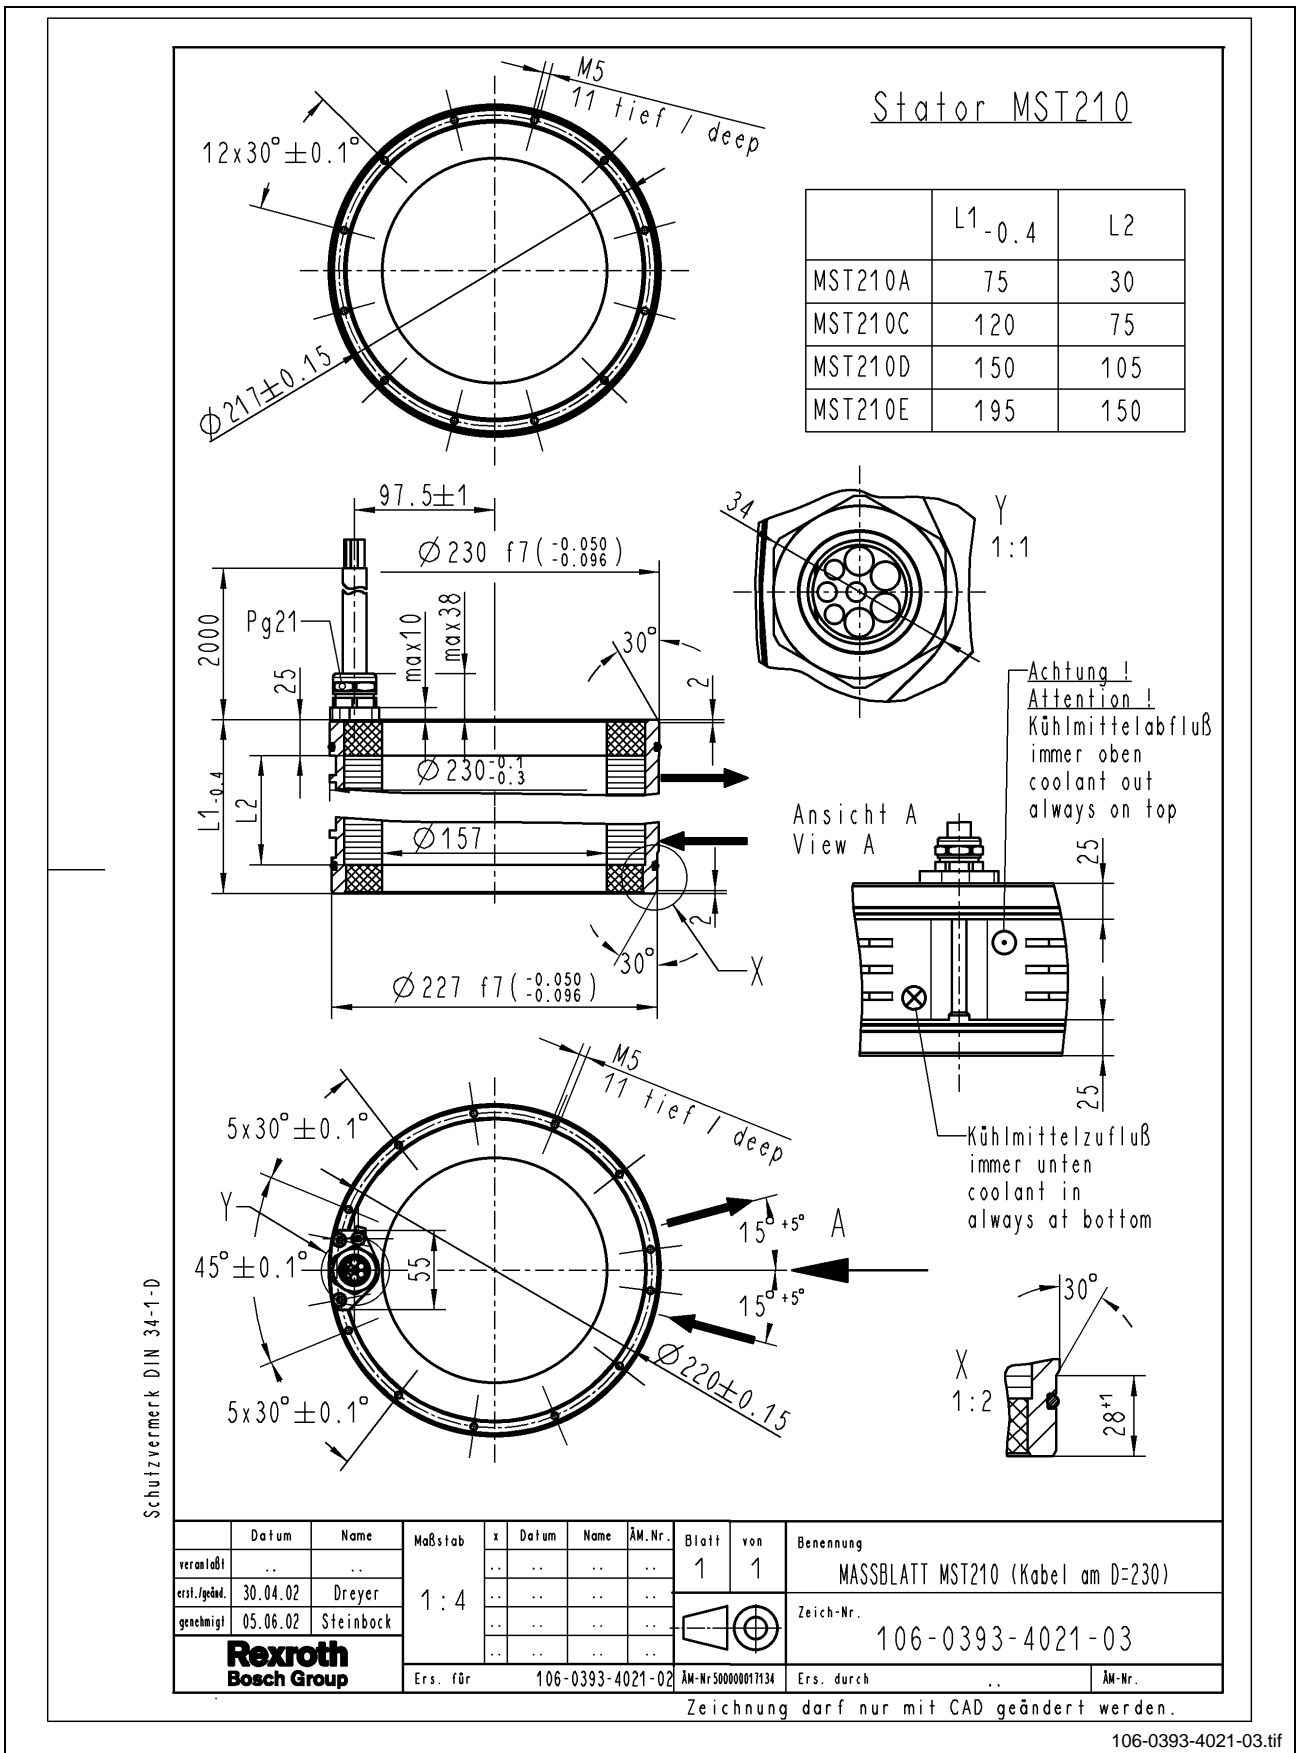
Dimension sheet MST210, electrical connection "CN"
